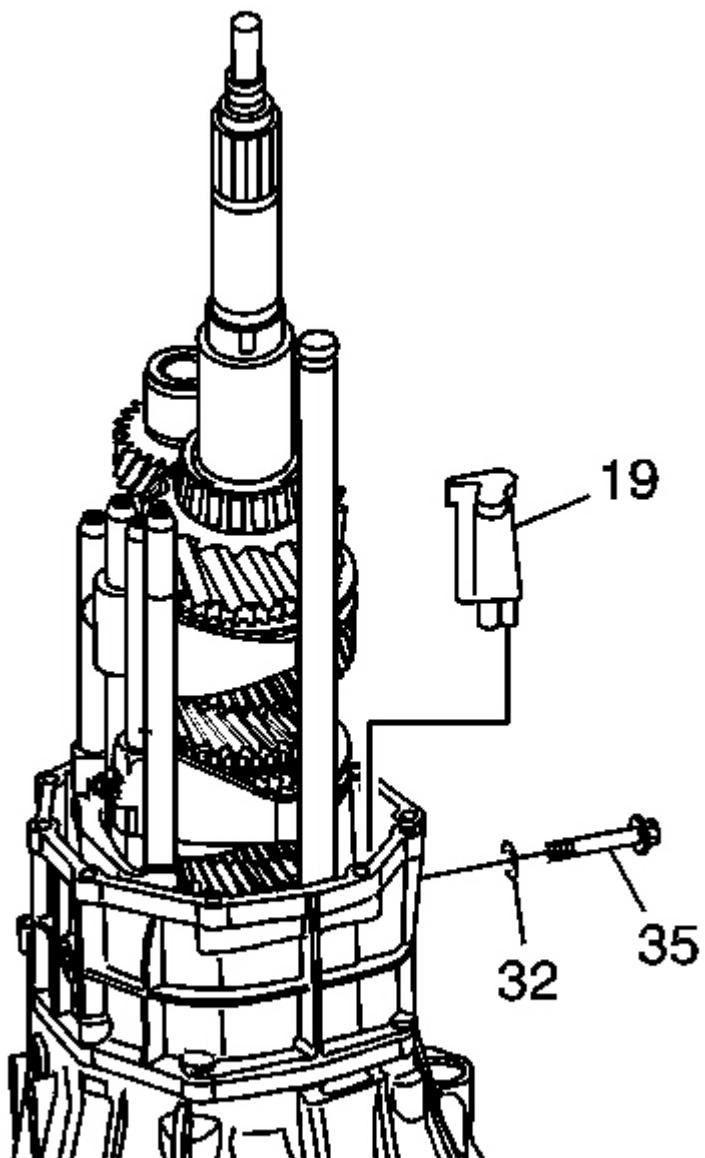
Identifying Oil Trough Pipe, Reverse Idler Gear Shaft Bolt & Gasket
